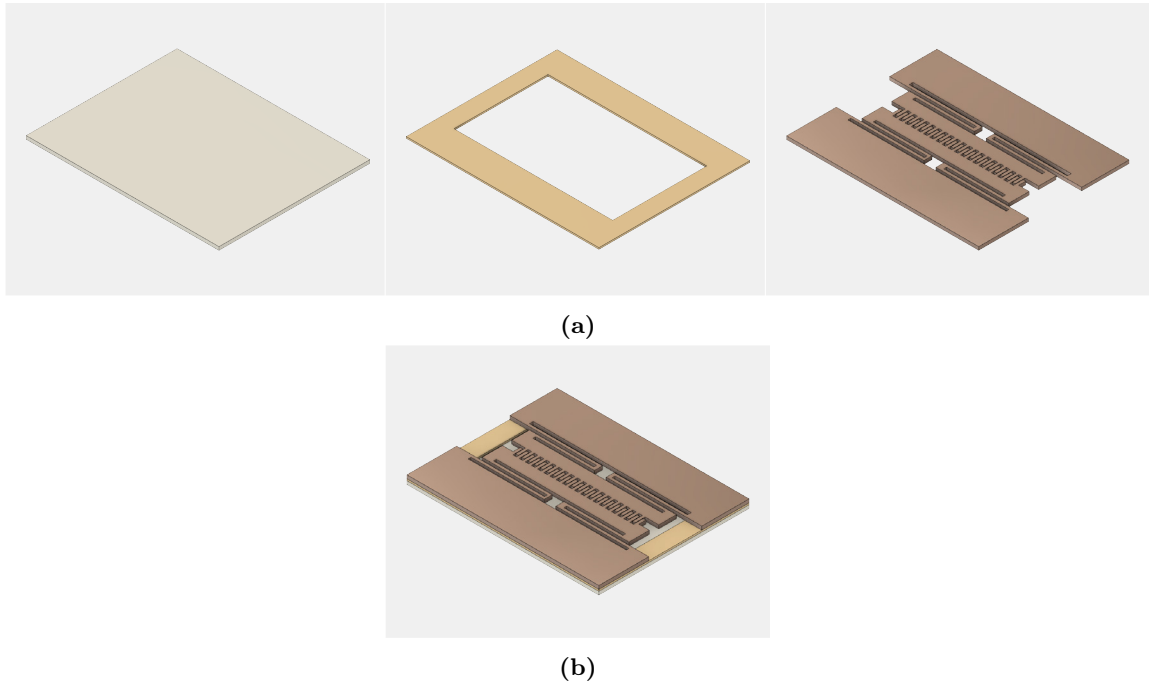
Schematic diagram of the MALL fabrication process. It consists of two steps: (a) fabricating the individual layer of MEM system using LAMPE micromachining, and (b) Multi-lamina assembly of LAMPE micromachined parts to fabricate MEM system.
